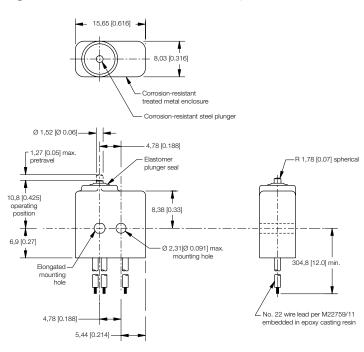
MICRO SWITCH™ XE Dimensions, Solder Terminal
